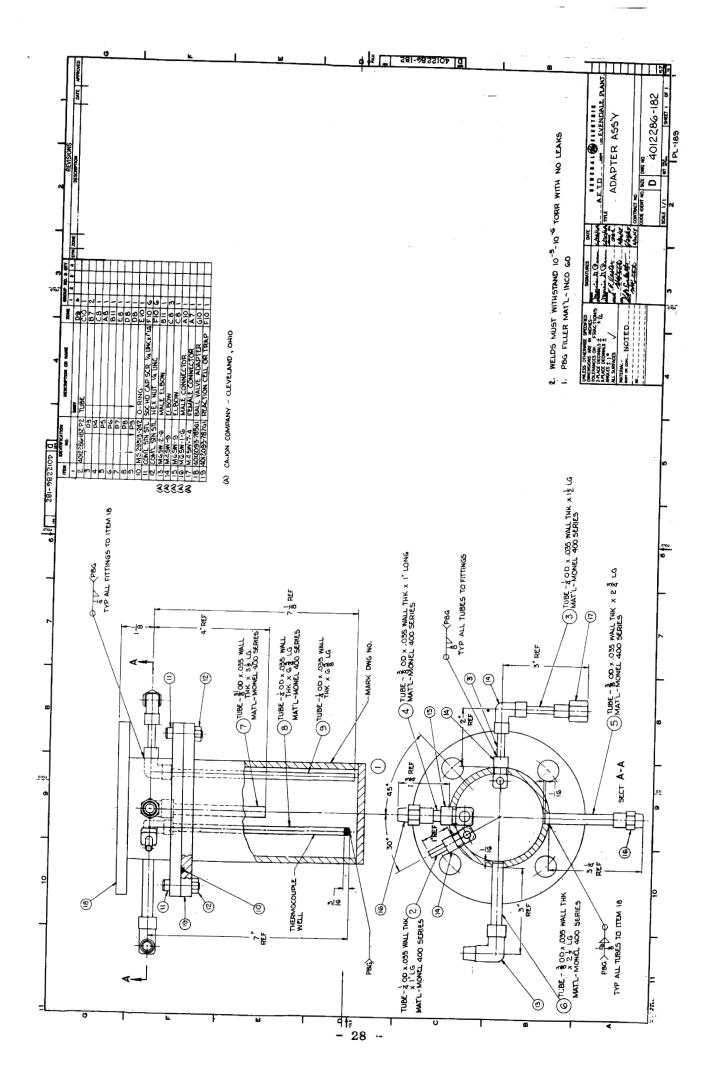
Extruder, Ball Valve, Adapter and Reaction Cell Assembly (C 64062552)
